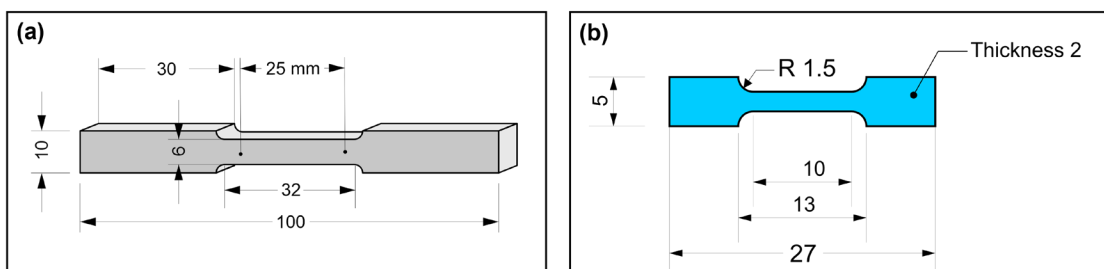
Dimensions of the (a) sub-size and (b) micro tensile specimen used in study
